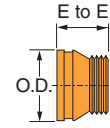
CONCENTRIC REDUCER— GROOVE BY THREAD
